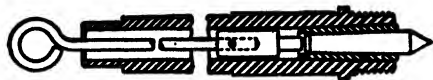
A knockout bar for removing the center from the headstock. (South Bend Lathe Works)
